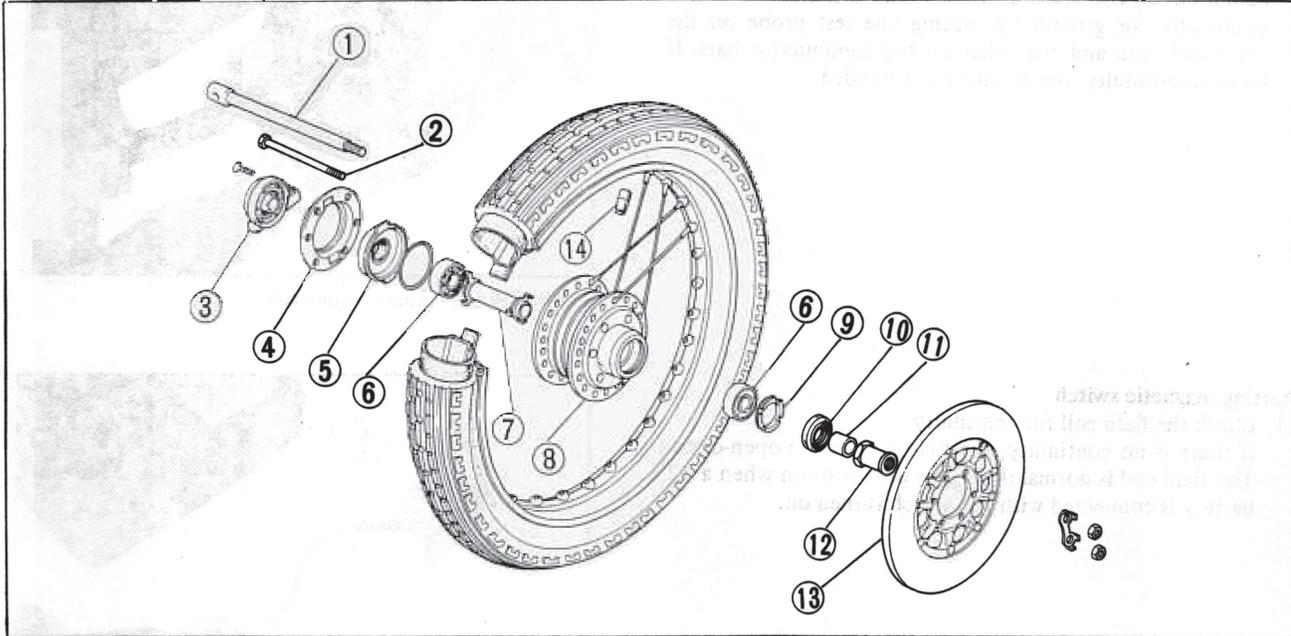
(1) Front wheel axle (2) Bolt (8x102mm) (3) Speedometer gear box (4) Gear box retainer cover (5) Gear box retainer (6) Ball bearing (#6302R) (7) Spacer collar (8) Front wheel hub (9) Bearing retainer (10) Oil seal (11) Collar (12) Front wheel axle nut (13) Brake disc (14) Balance weight
